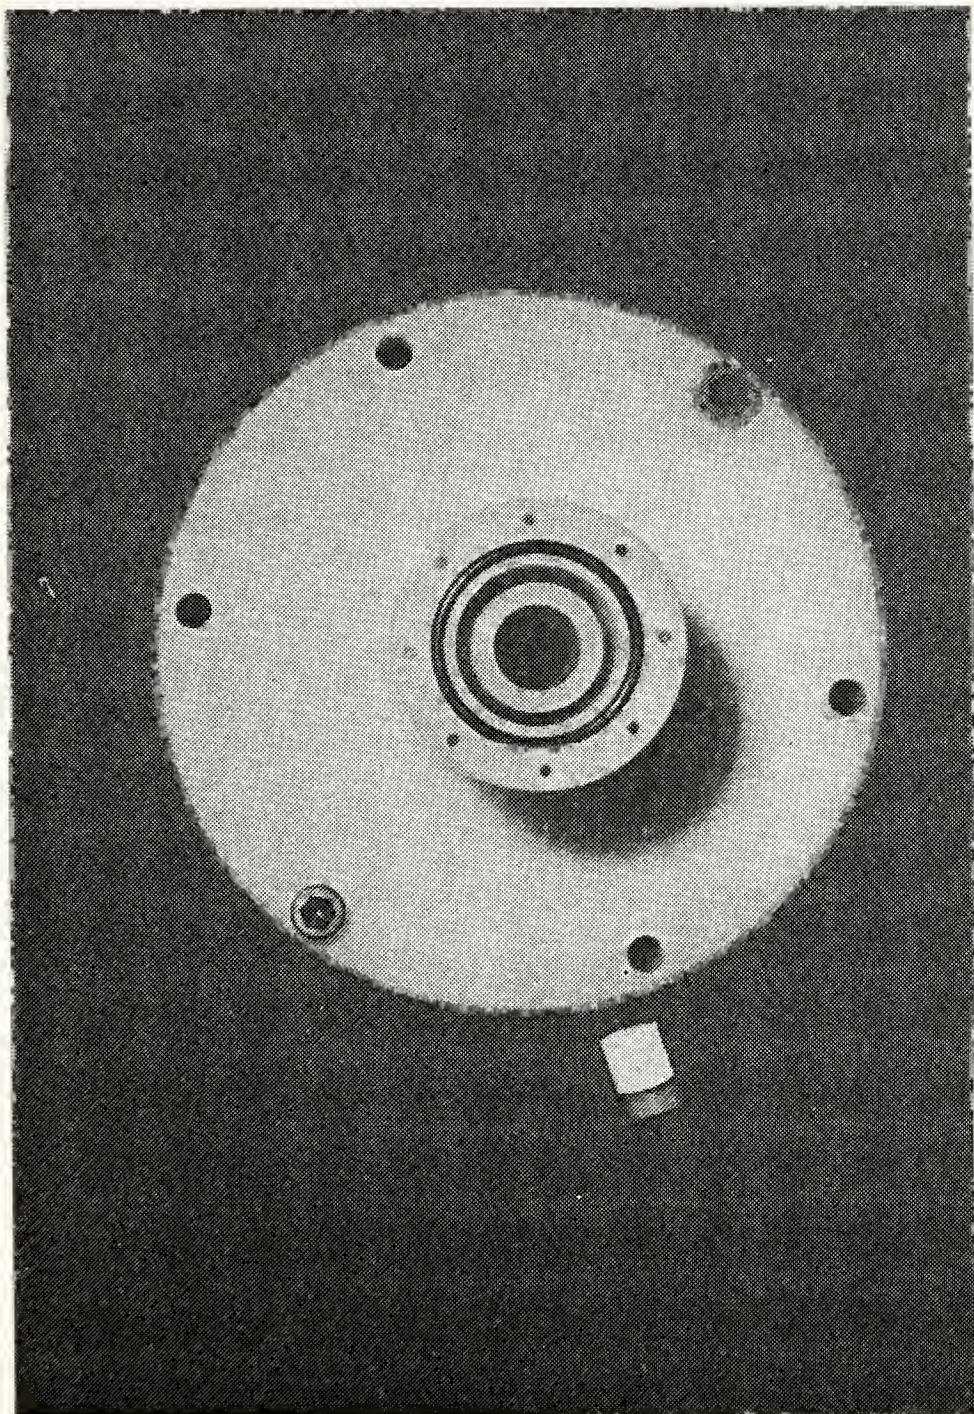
Photograph of "O"-Ring Seal on Front Chamber Face
